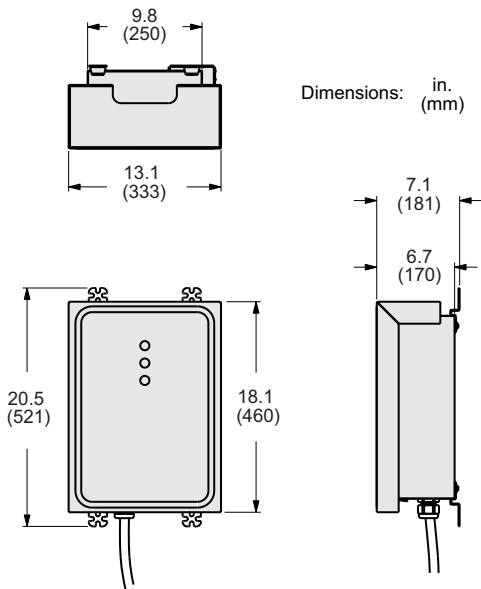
Wall-Mount Cable Bracket with Connector Dock
